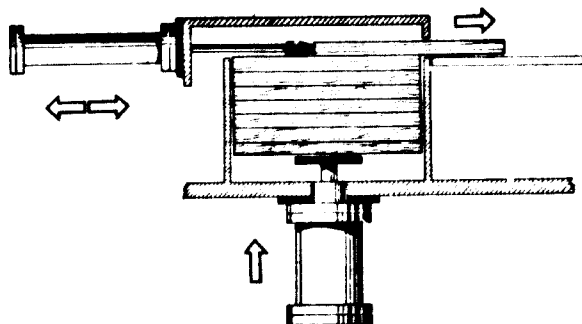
Channel/stack hopper feed out at top or side tensioning and push-out by means of pneumatic cylinders.
